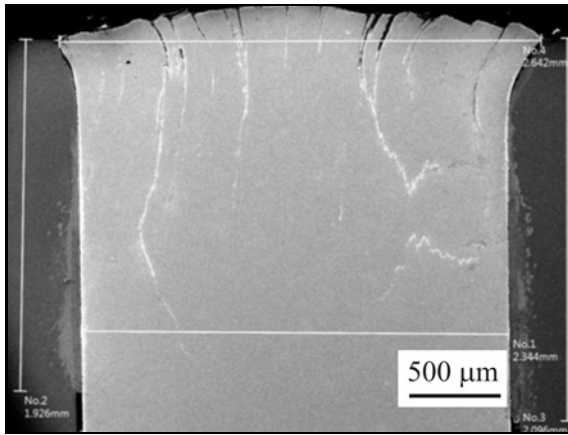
Tungsten insert in CuCrZr after 800 welds.
